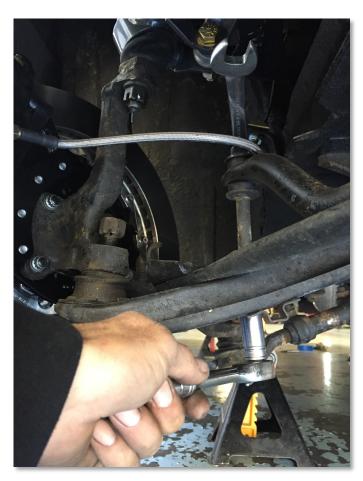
Here the hardware is being removed that connects the sway bar and strut rod to the stock lower control arm
